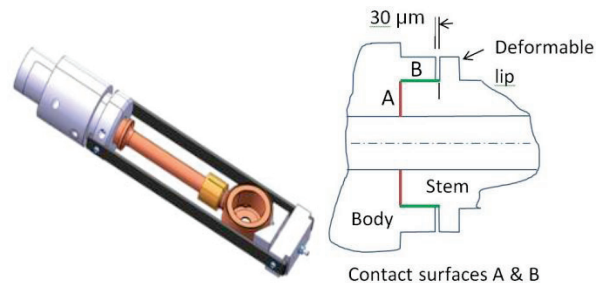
Stage 2: view of the contact surfaces and the welding fixture.
